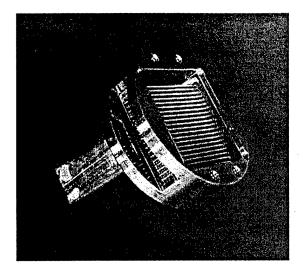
The capillary array heat exchanger assembled in a separate metal section, as an alternate method of fabricating an ASHE unit.
